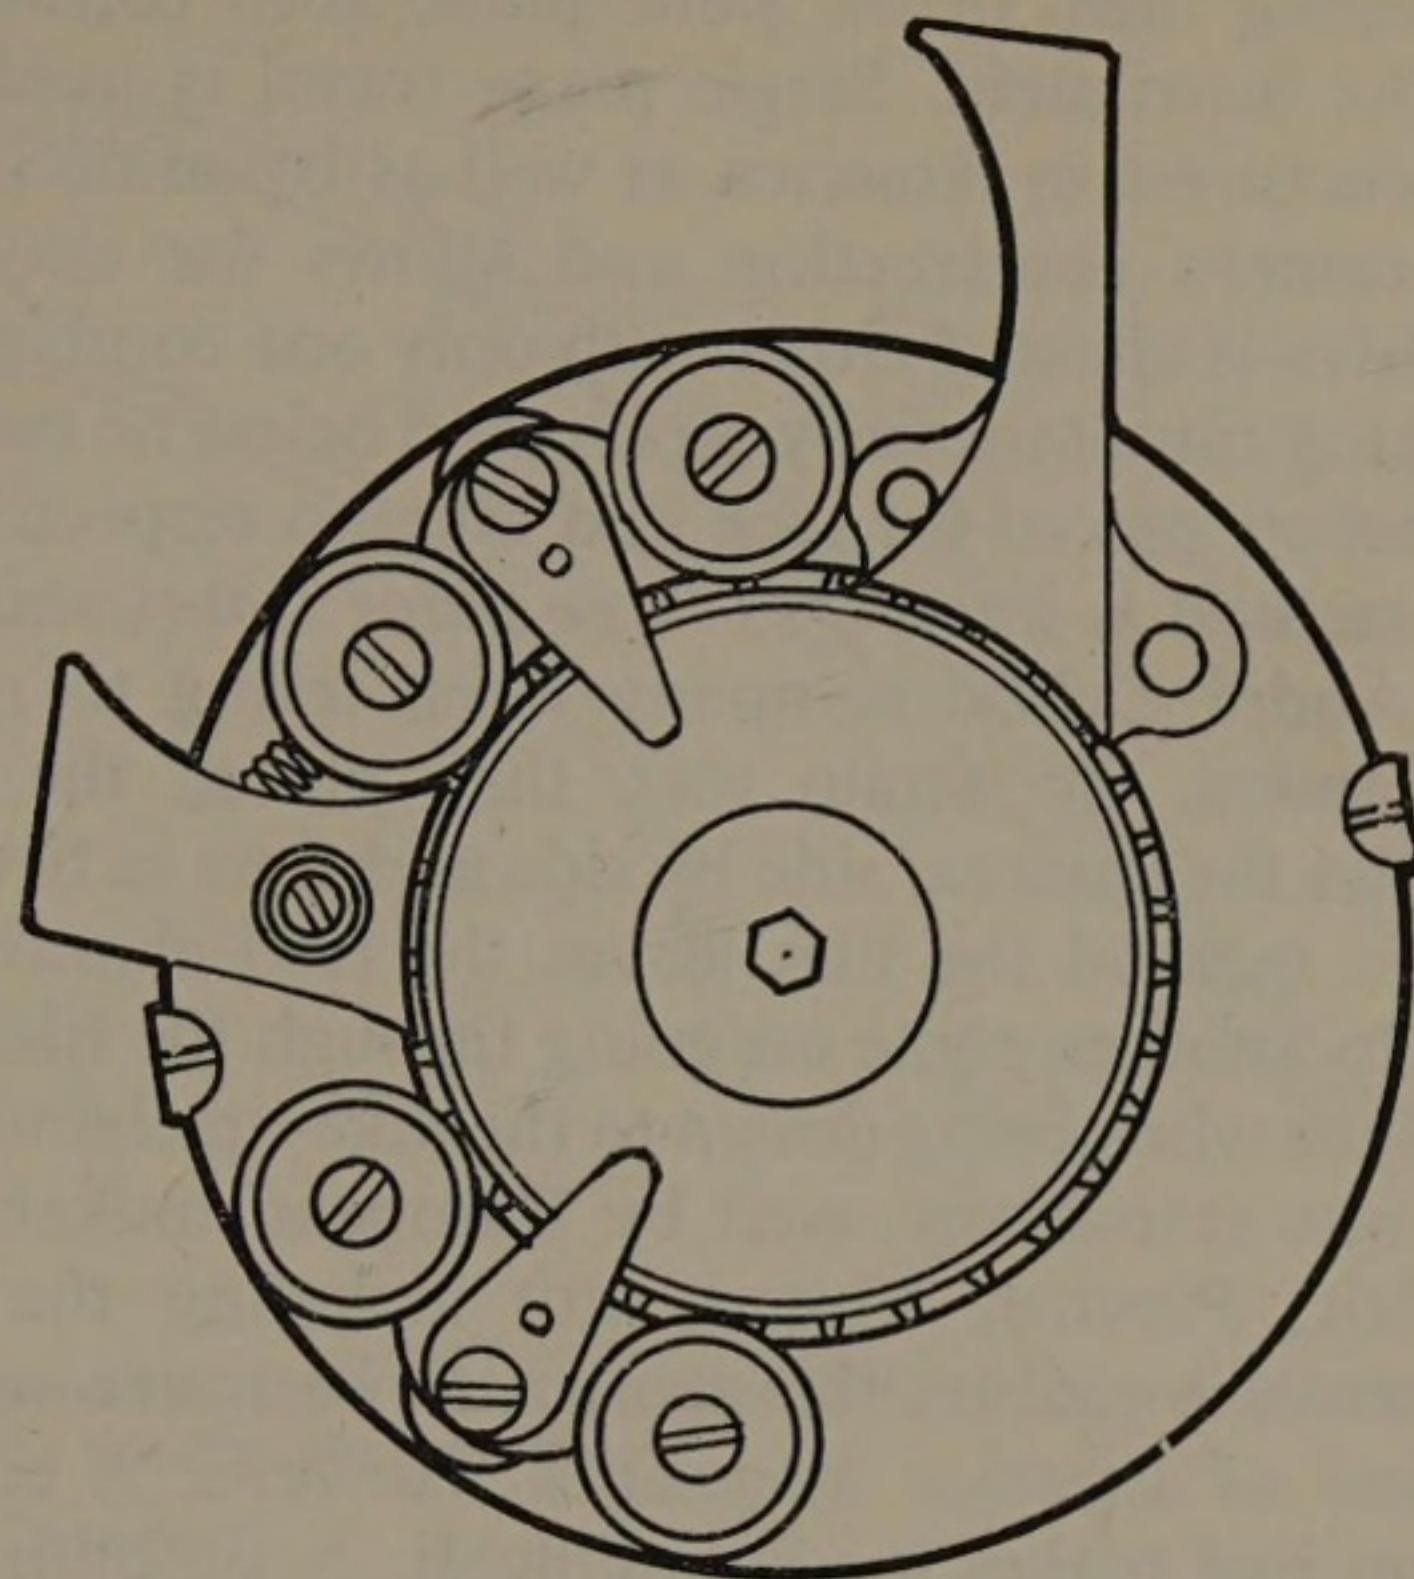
Bell & Howell's 32-teeth large sprocket with pressure rollers and strippers.
